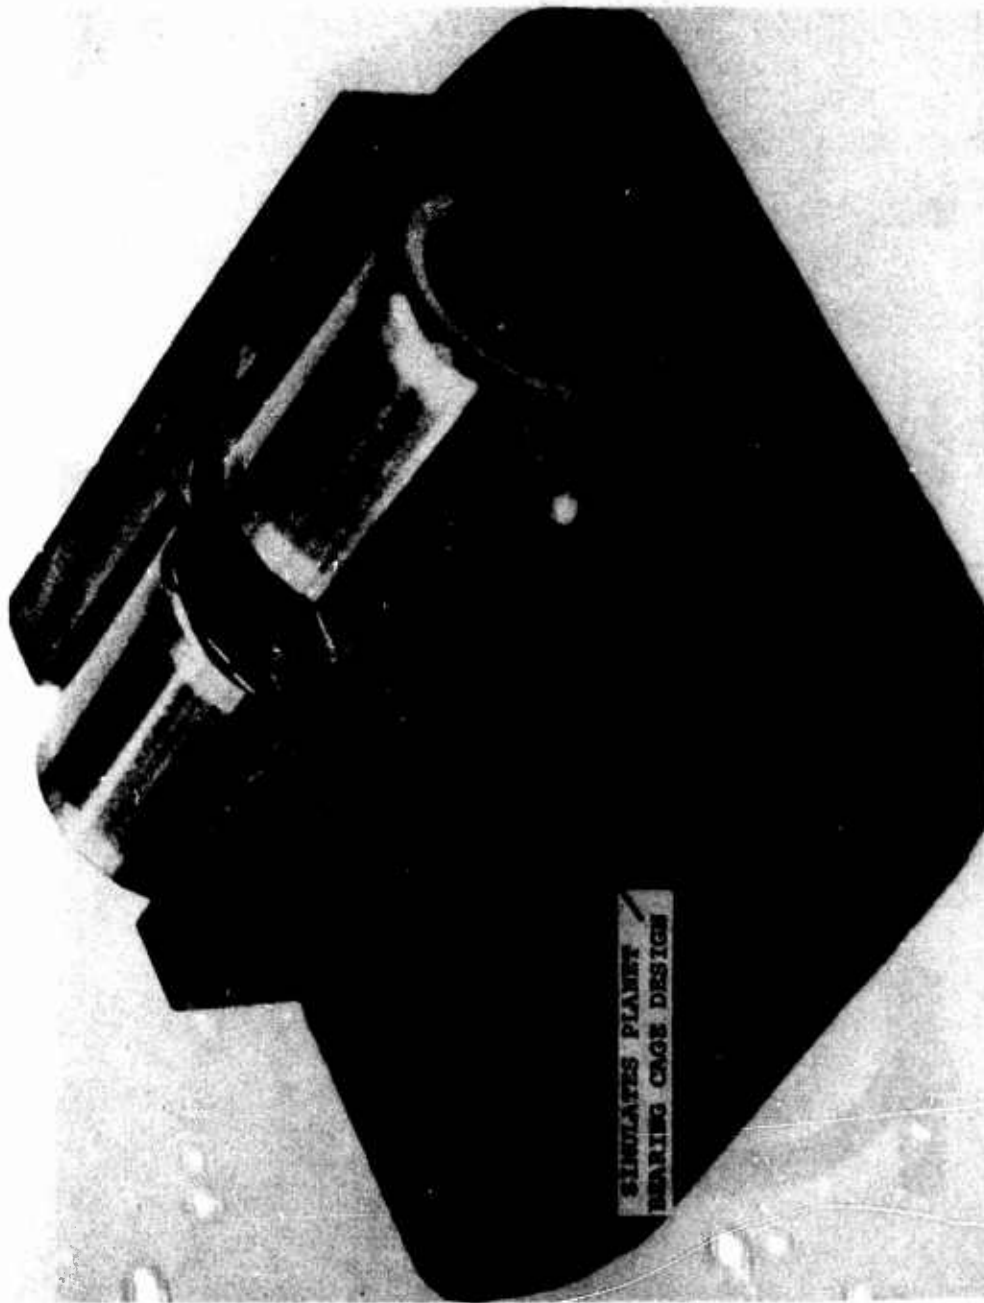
Test Rollers Held In Tandem Position by Fixture.
